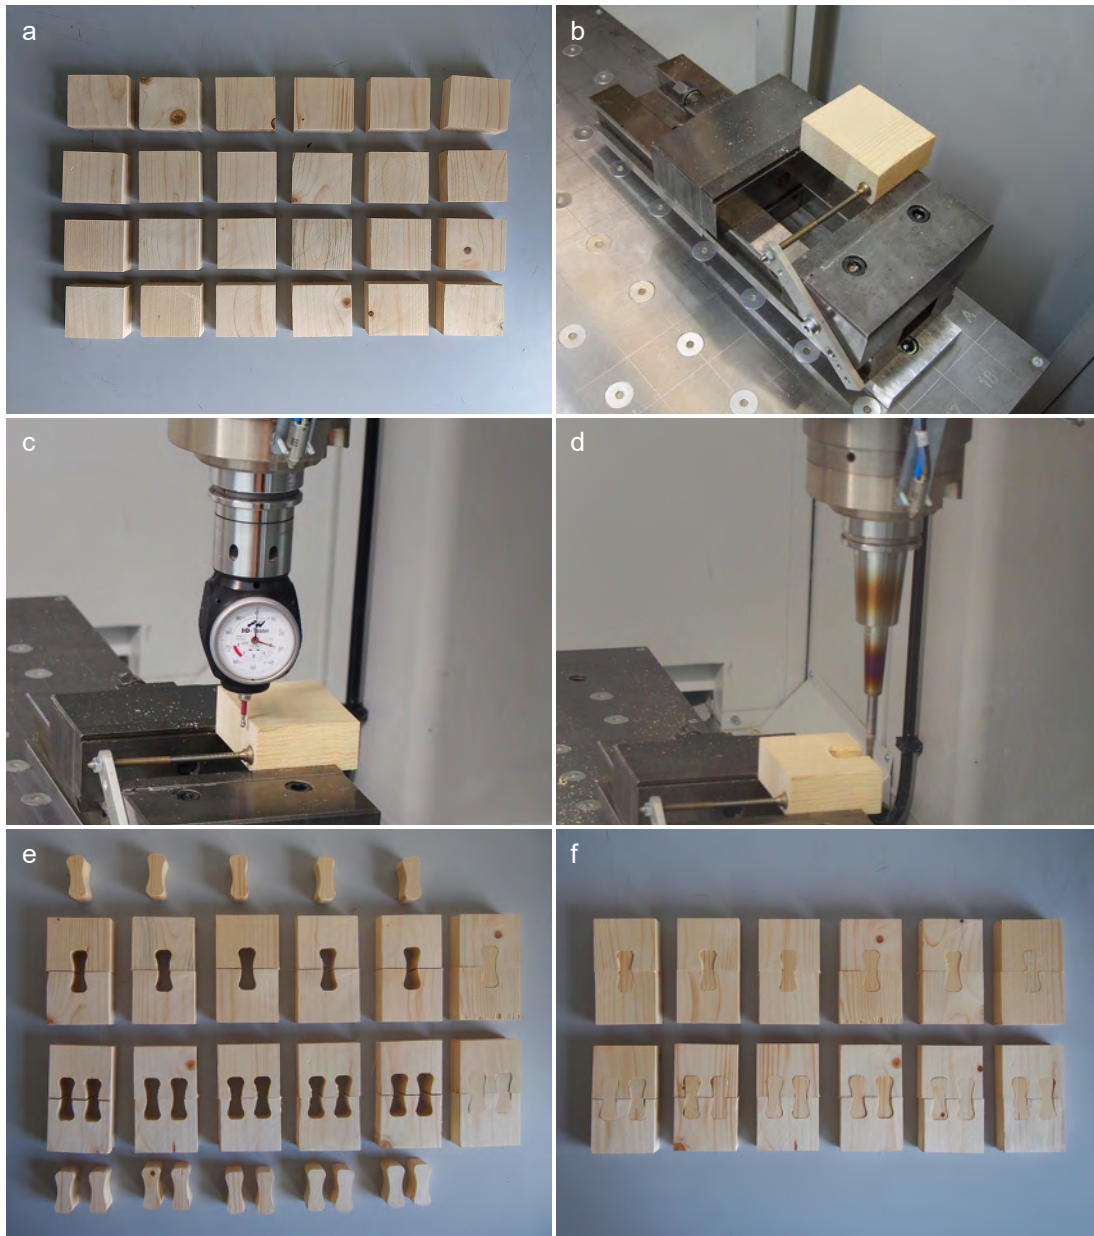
Fabrication of the specimens: a) Raw specimens, b) Fixed specimen in the CNC machine vise, c) Measuring the coordinates of the specimen, d) Milling the joints, e) Fabricated specimens, f) Assembled specimens.
